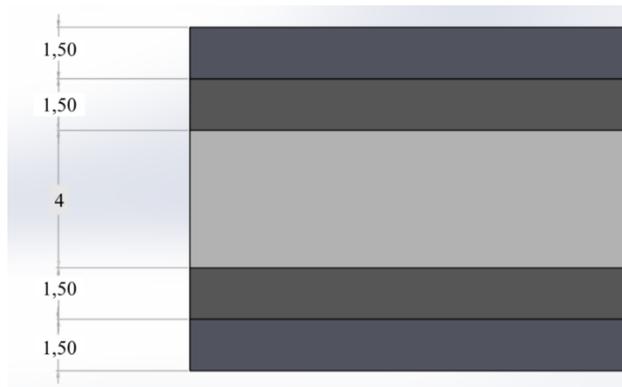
Sketch of the thickness dimensions of the material layers in millimeters
